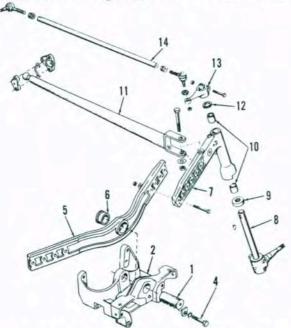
Exploded view of swept back axle used on some MF230 and MF235 models. Refer to Fig. 2 for legend except radius rods (11).
